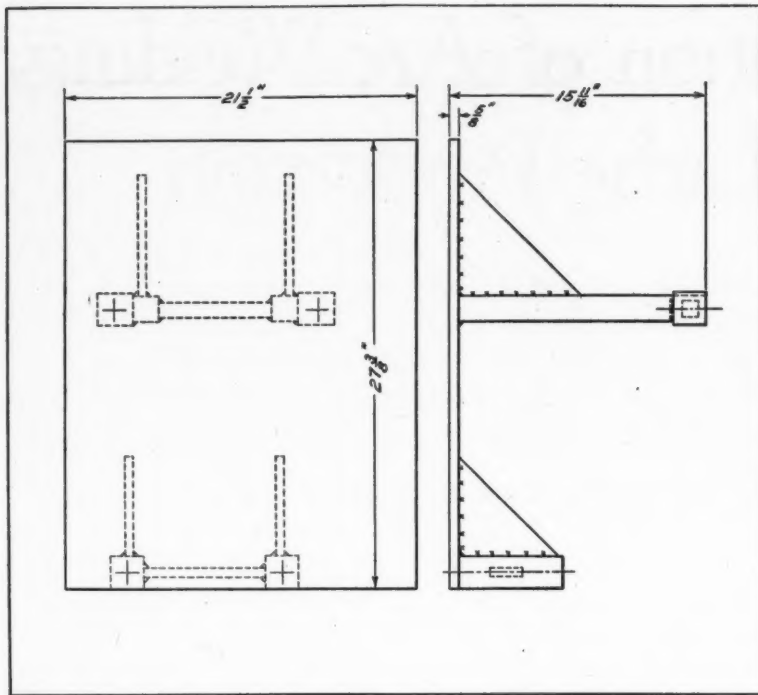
First Redesign of Motor Base Shown in Fig. 1 for Welded Construction
